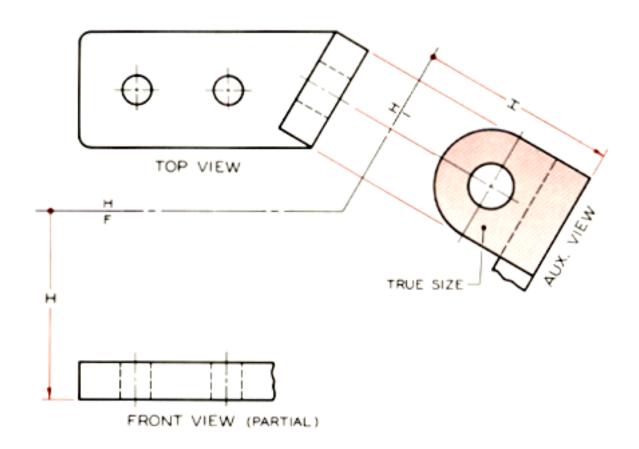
When the object is drawn on a sheet of paper, it would be laid out in this manner. The front view is drawn as a partial view since the omitted part is shown true size in the auxiliary view.
